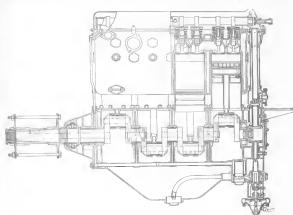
CRANK SHAFT AND CRANK, SIDE VIEW
